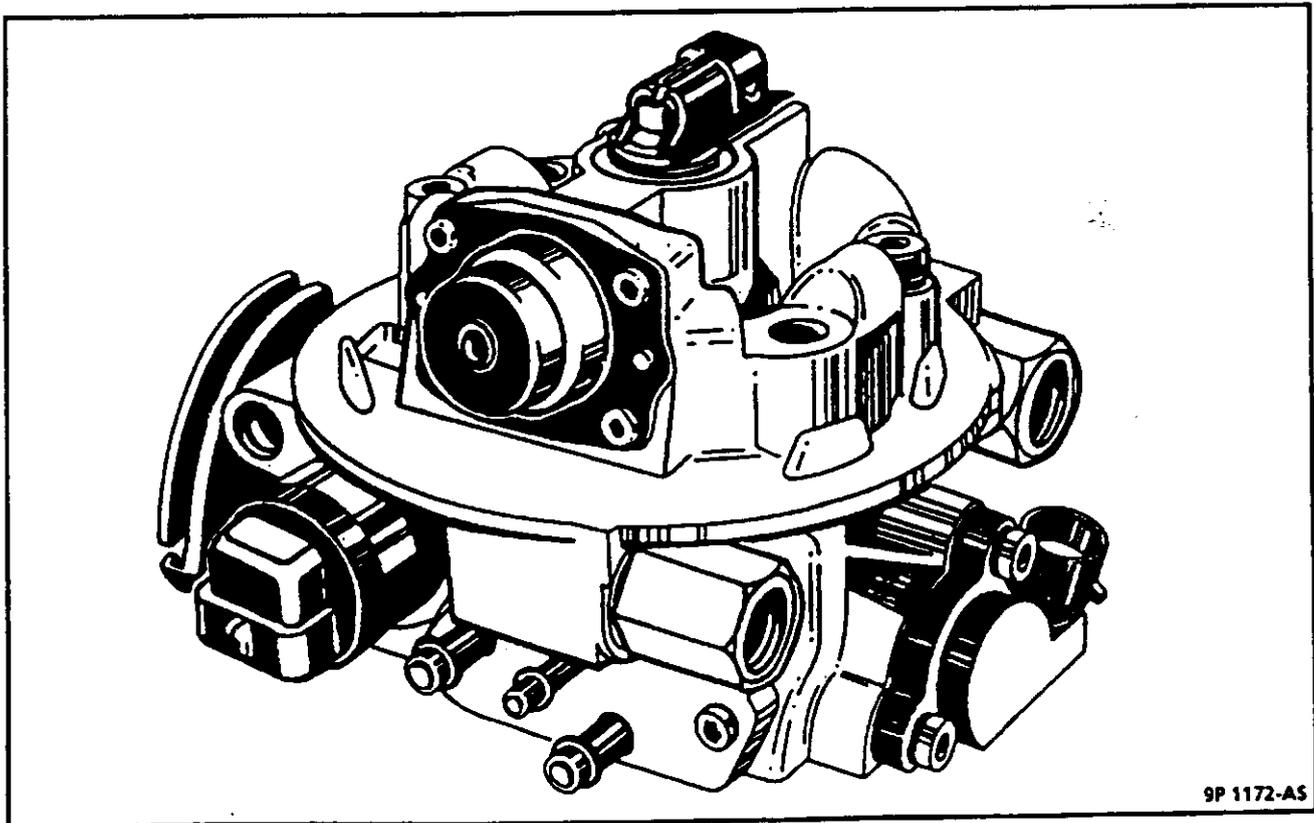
Model 700 Throttle Body Injection Unit
